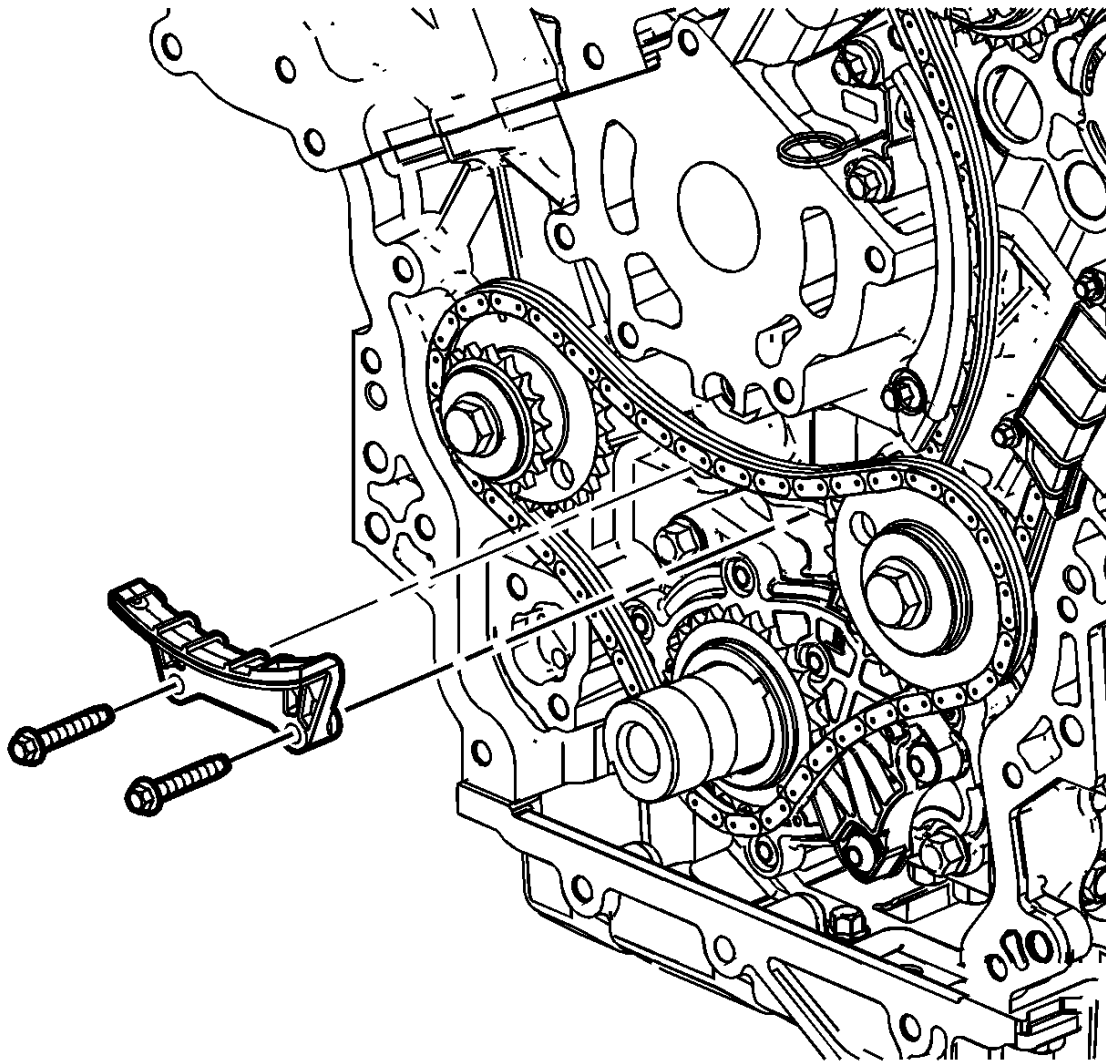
View Of Upper Primary Camshaft Drive Chain Guide
